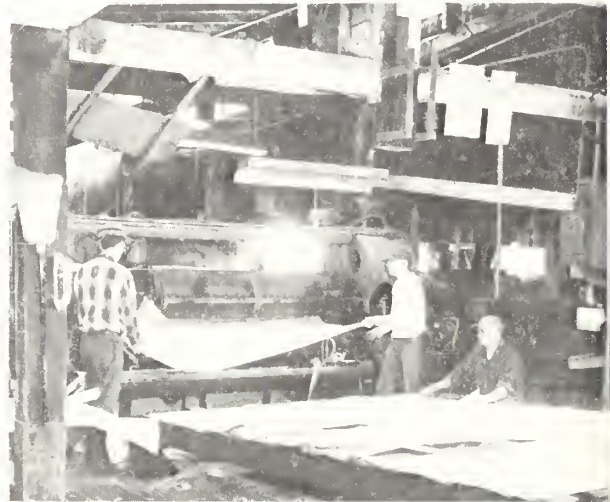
Sheets of rotary-cut veneer coming off the lathe.
